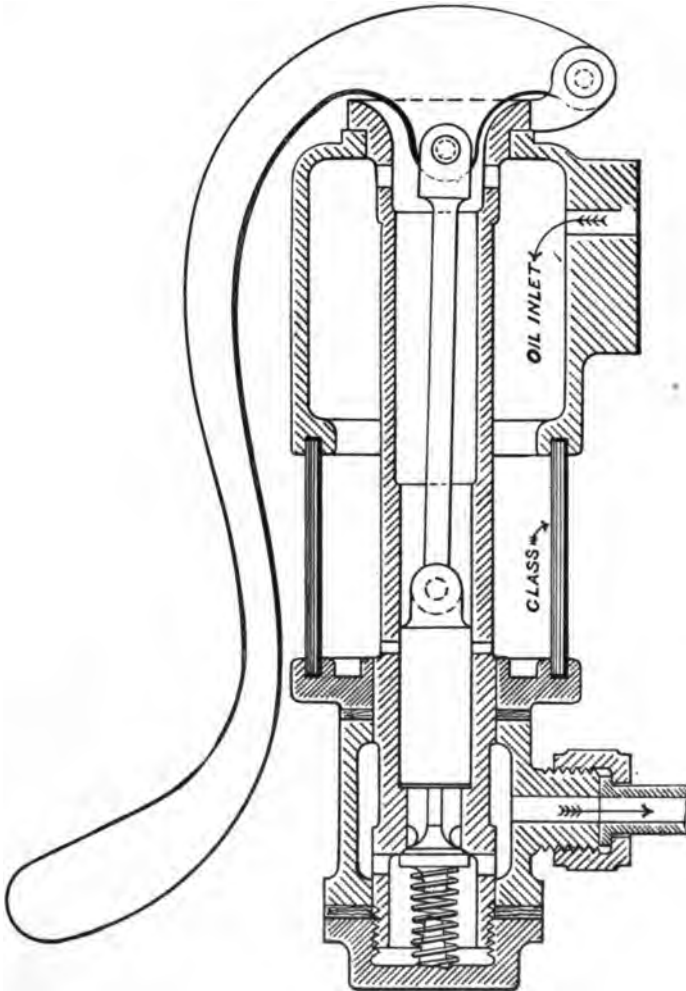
LUBRICATING PUMP WITH GLASS BODY.
